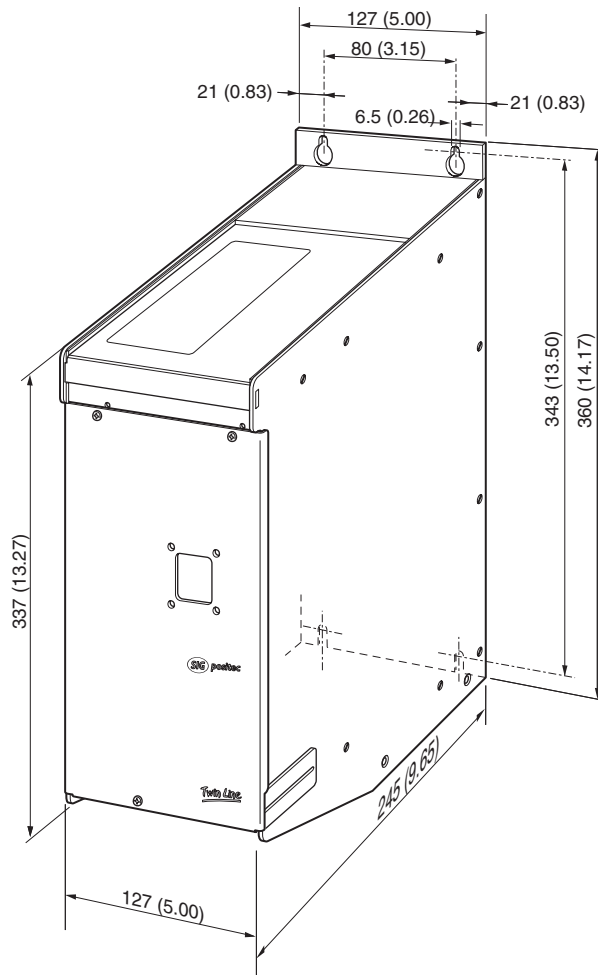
Dimensions TLC51x IP54 in mm (in.)
